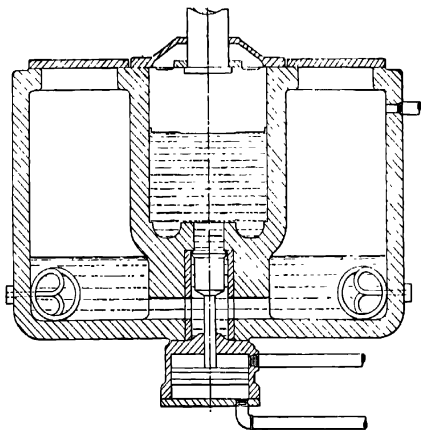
Hydro-pneumatic die-cushion. (Marquette)
